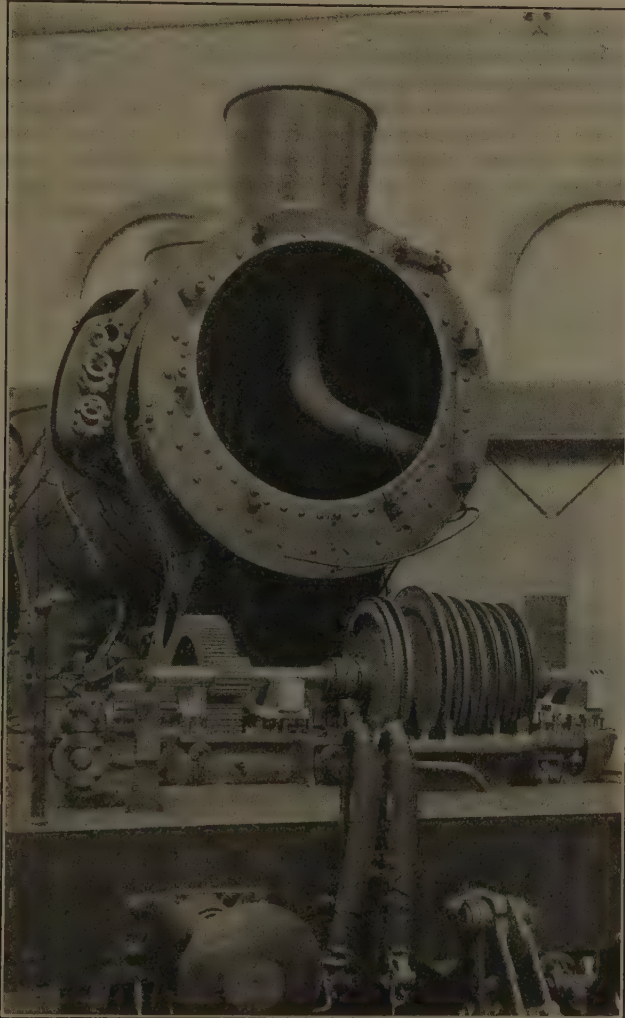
TURBINE ROTOR AND FIRST REDUCTION GEAR
